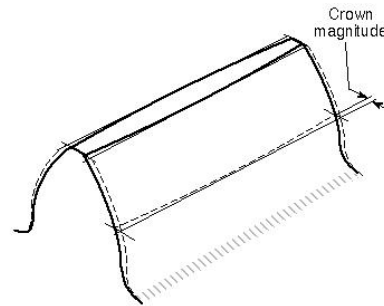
Three-dimensional view of the surface of a spur tooth having lead crowning (continuous) against a pure involute (dashed). [ANSI/AGMA 1012-G05]
